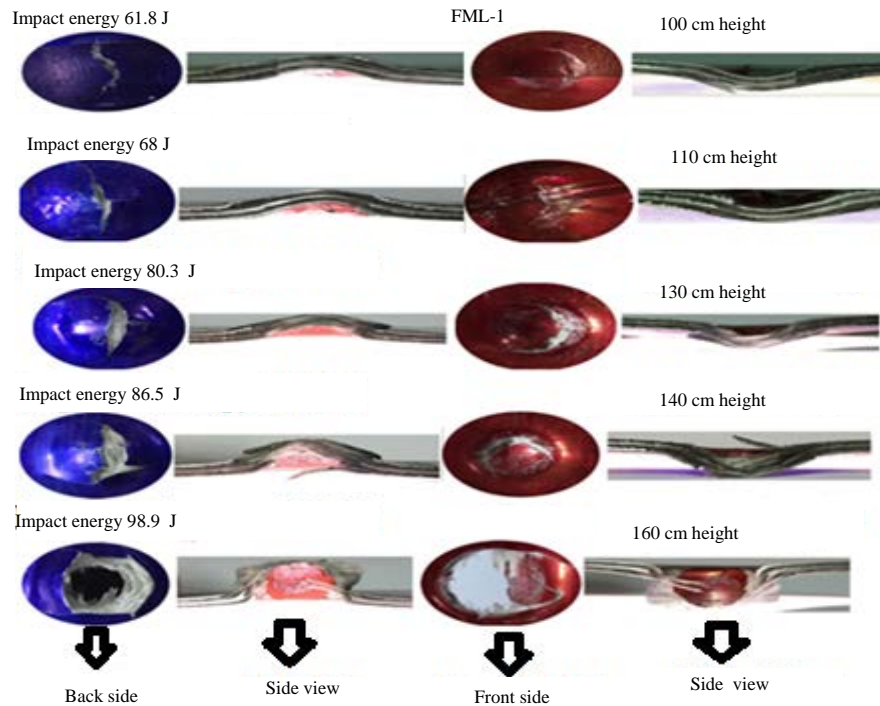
FML-1, magnified scale of fracture surface due to drop weight impact test
